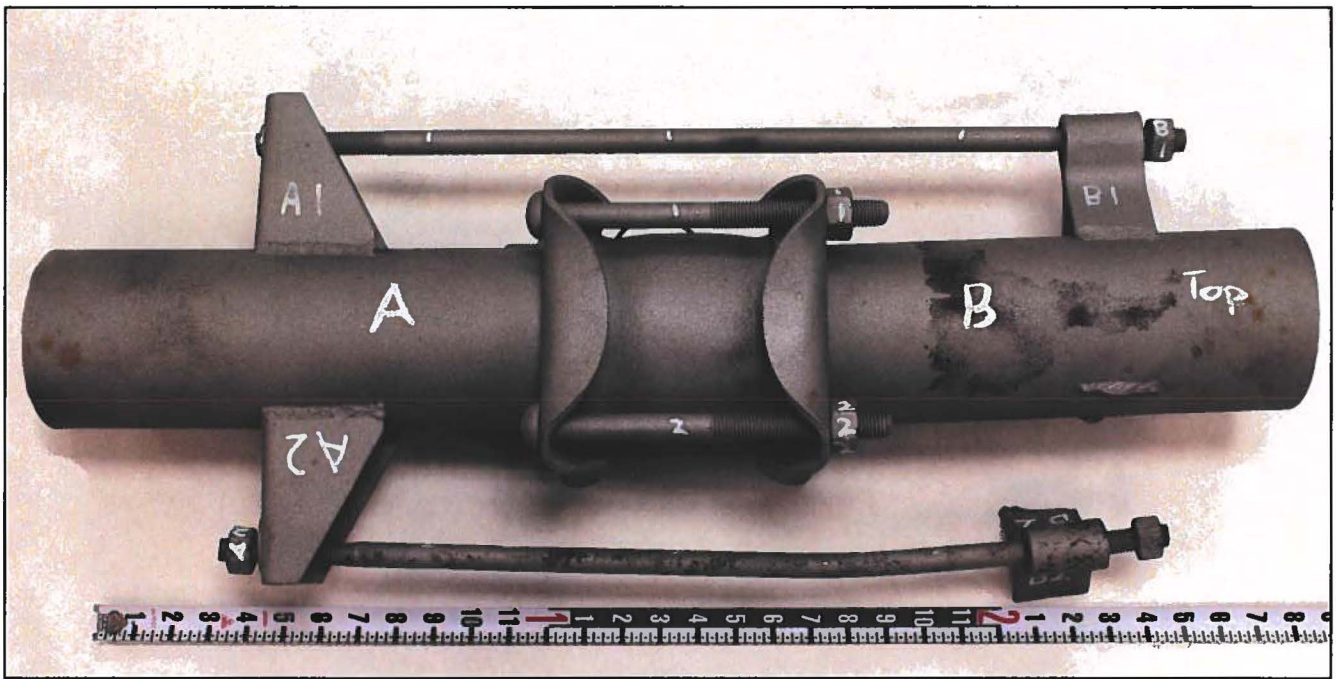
Photograph of the top of the submitted coupling. Lug and rod identifications are shown.
